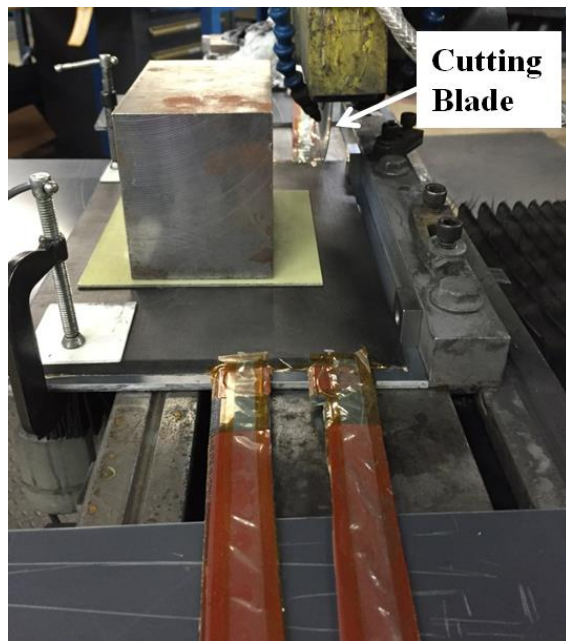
ENF specimen fabrication: specimens machined from cured panel
